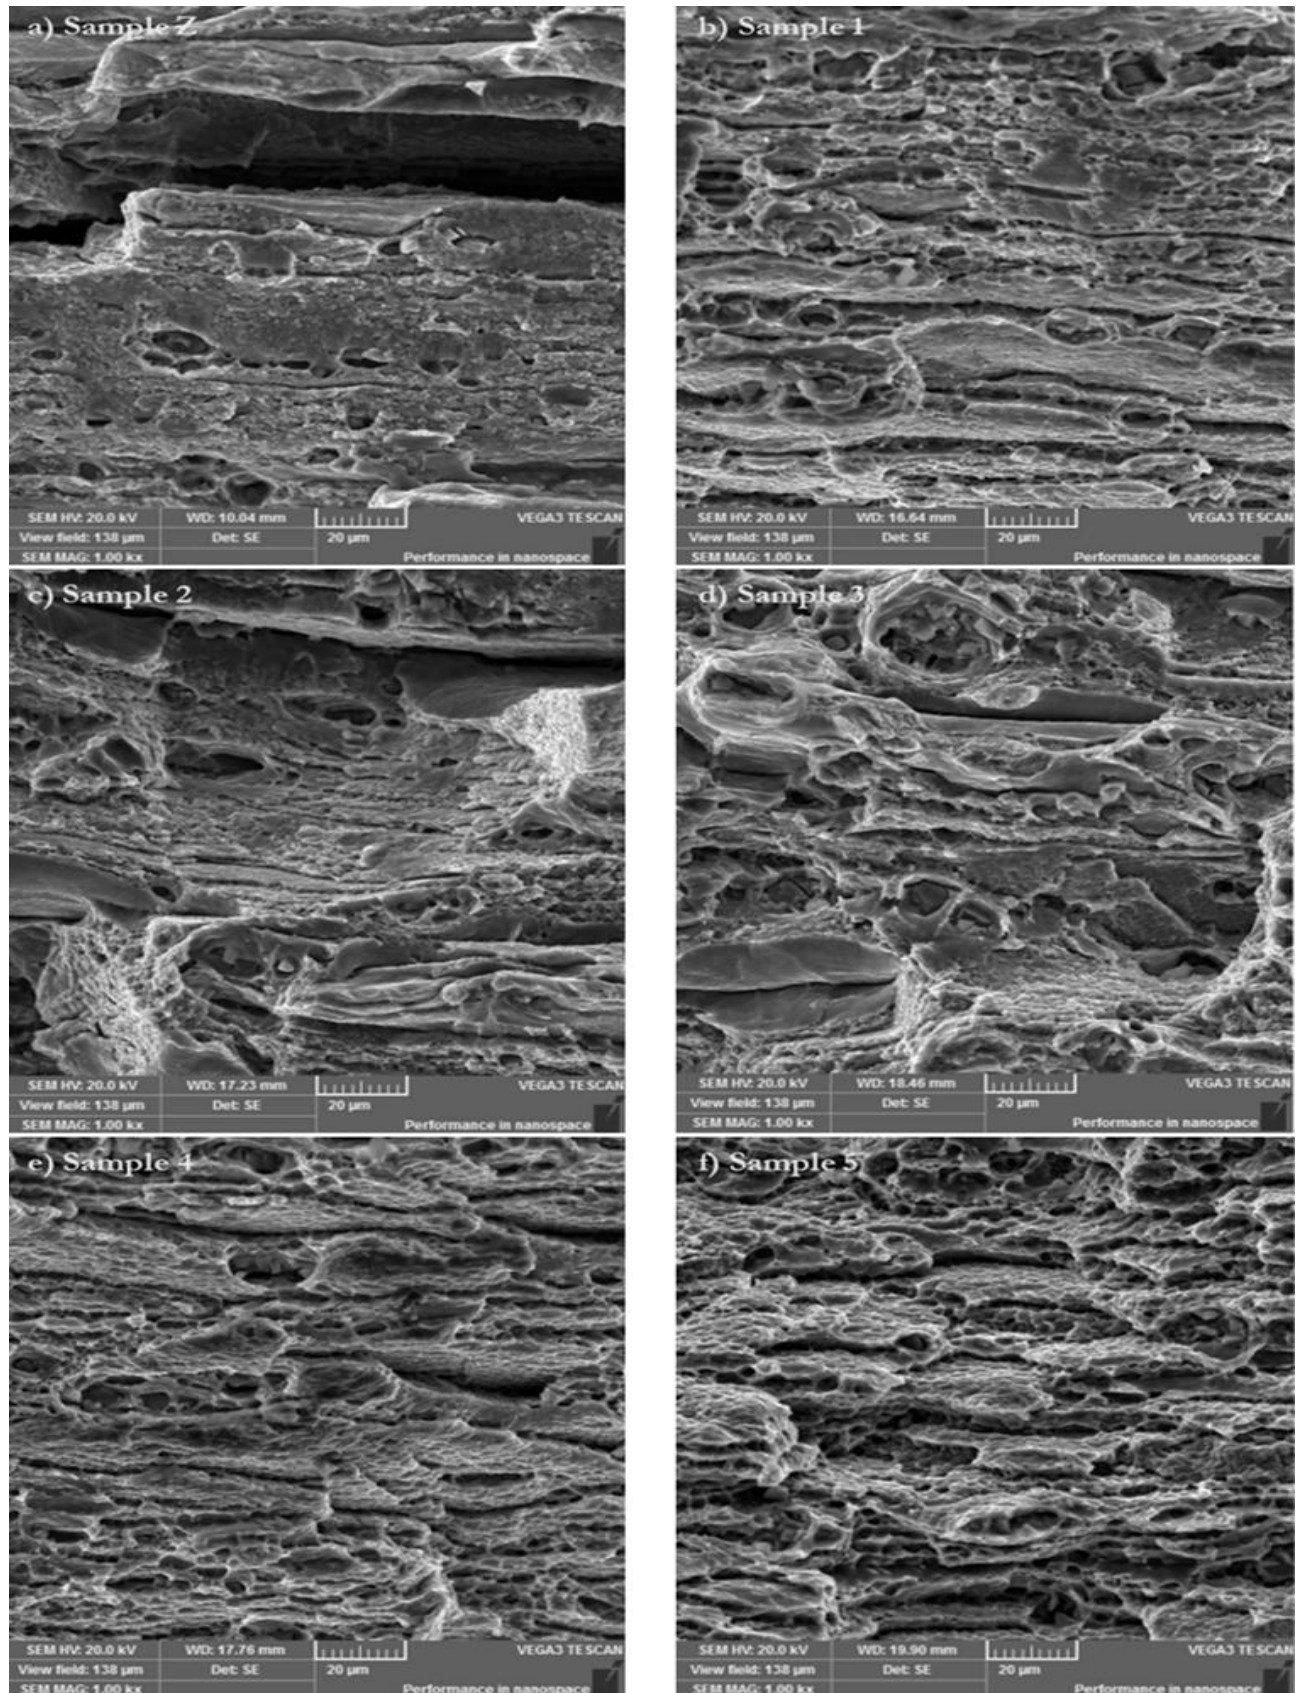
Fractographic analysis of fracture surfaces of EN AW-7022 samples after tensile test: a) T651, b) 475 °C/30min, c) 525 °C/30min, d) 575 °C/30min, e) 475 °C/20min, f) 500 °C/20min
